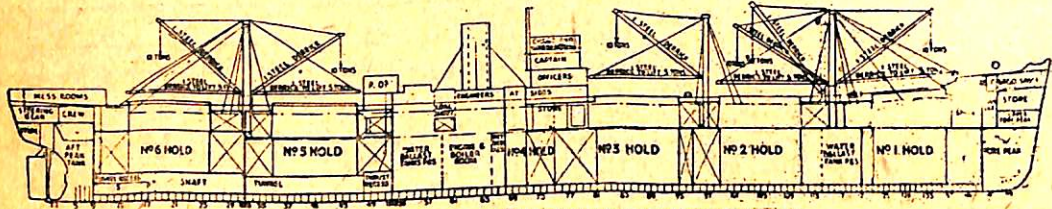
"C" TYPE PARTIALLY FABRICATED STANDARD CARGO STEAMSHIP
